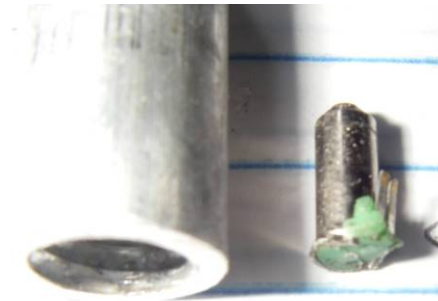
Long Silver type motor with rear end deformed due to setback loads in launch 40
